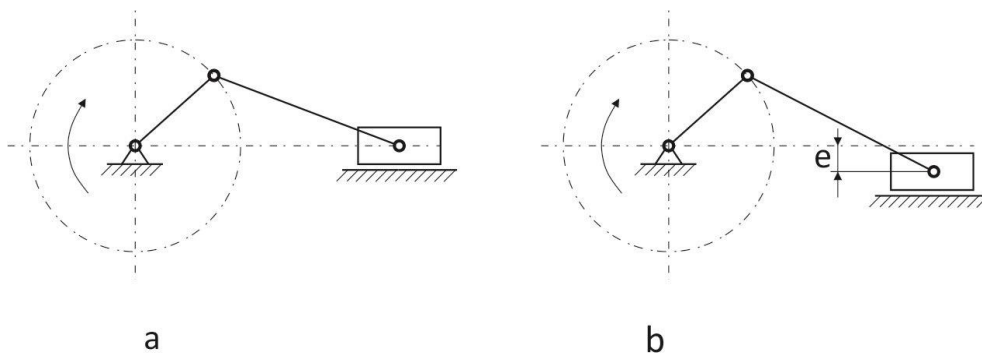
Crank slider mechanism a) without eccentricity ($e=0$), b) with eccentricity ($e \neq 0$)
